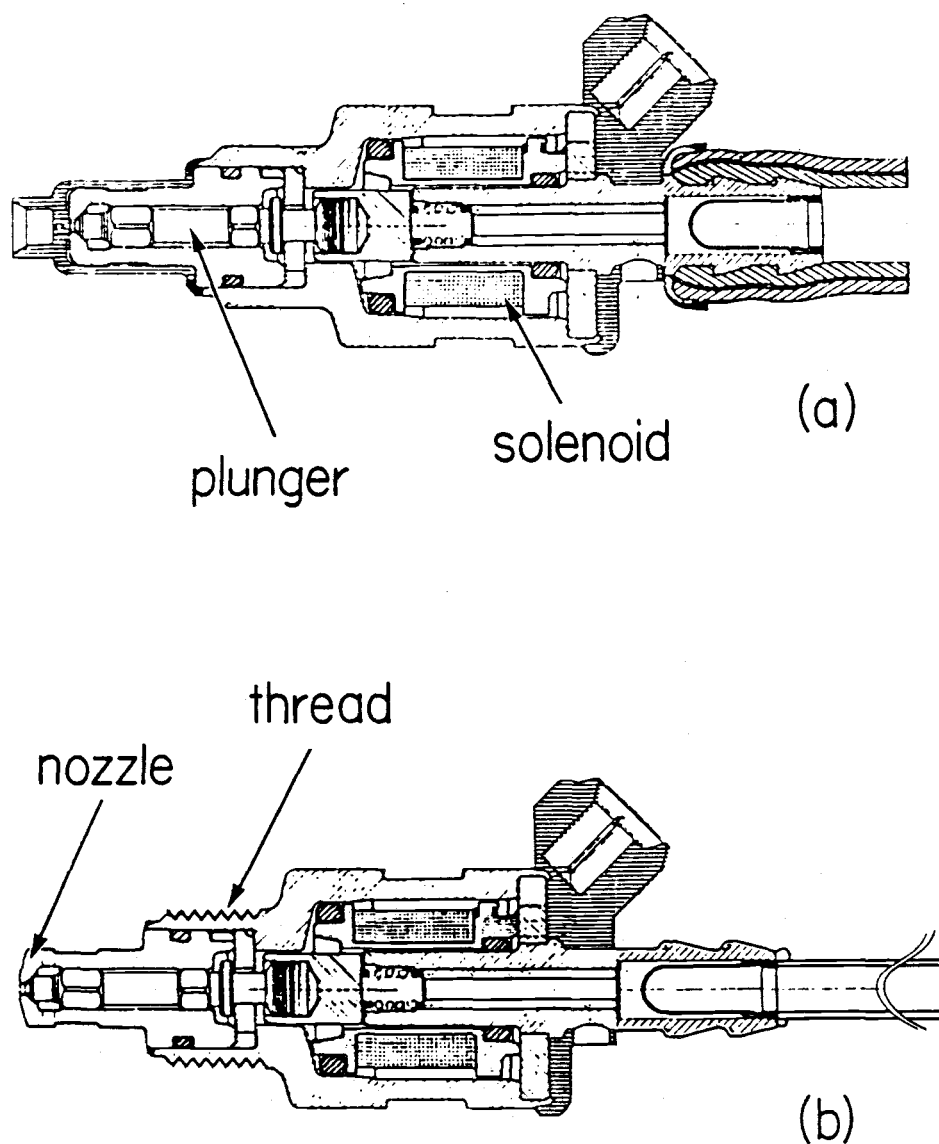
Modification of BMW injector valve for use as a pulsed supersonic jet. A cutaway drawing of the unmodified valve is shown in (a) and the initial room temperature modifications are shown in (b). (from Bosch)
